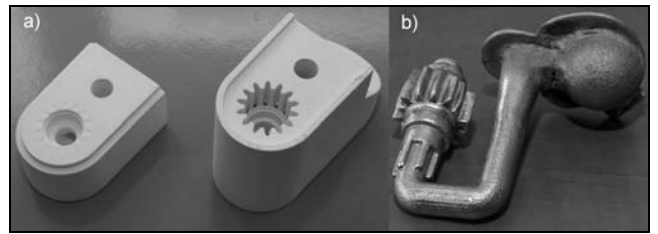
Casting mould produced by ZCast 3DP method (a), cast – gear wheel (b)
